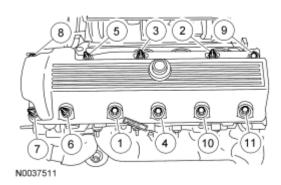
Valve Cover Torque Sequence Courtesy of FORD MOTOR CO.
